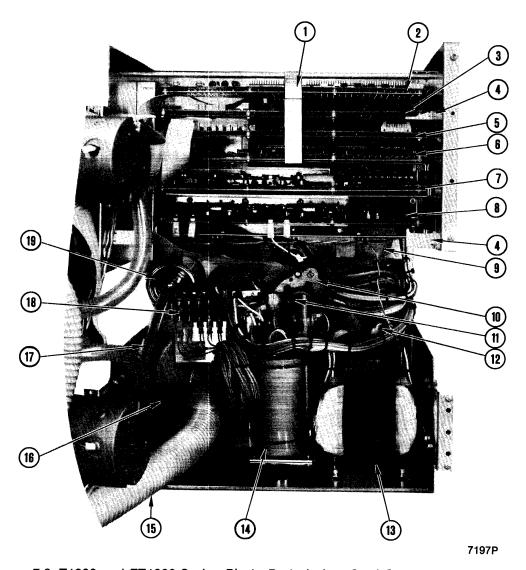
T1000 and FT1000 Series Photo Parts Index, Card Cage and Power Supply
